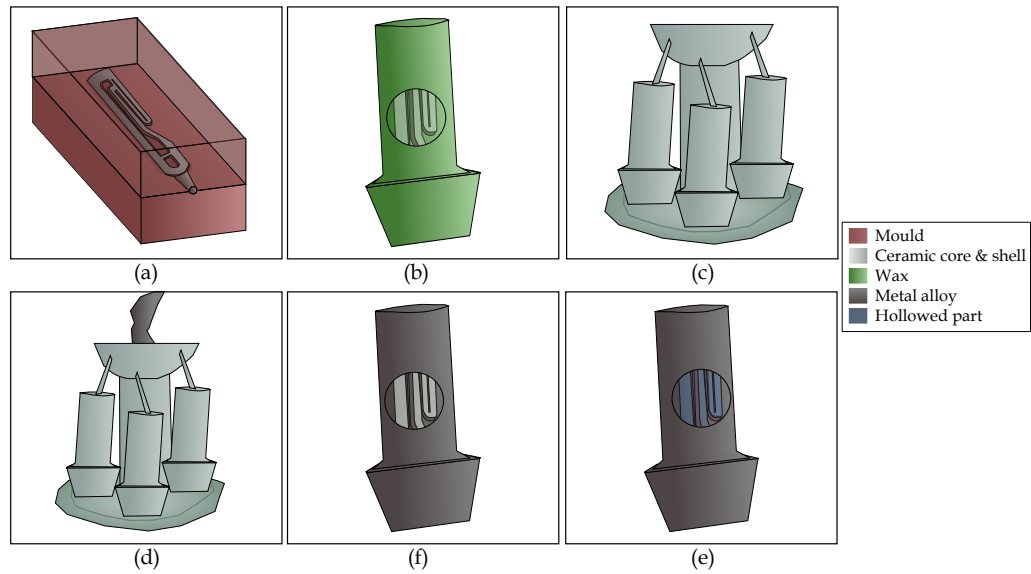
Schematic of the investment casting process. (a) Core injection moulding. (b) Core encapsulation in wax pattern. (c) Shell and de-waxing. (d) Casting. (e) Shell removal. (f) Core removal.
